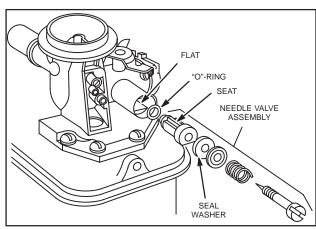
NEEDLE VALVE ASSEMBLY PRESS-IN TYPE
